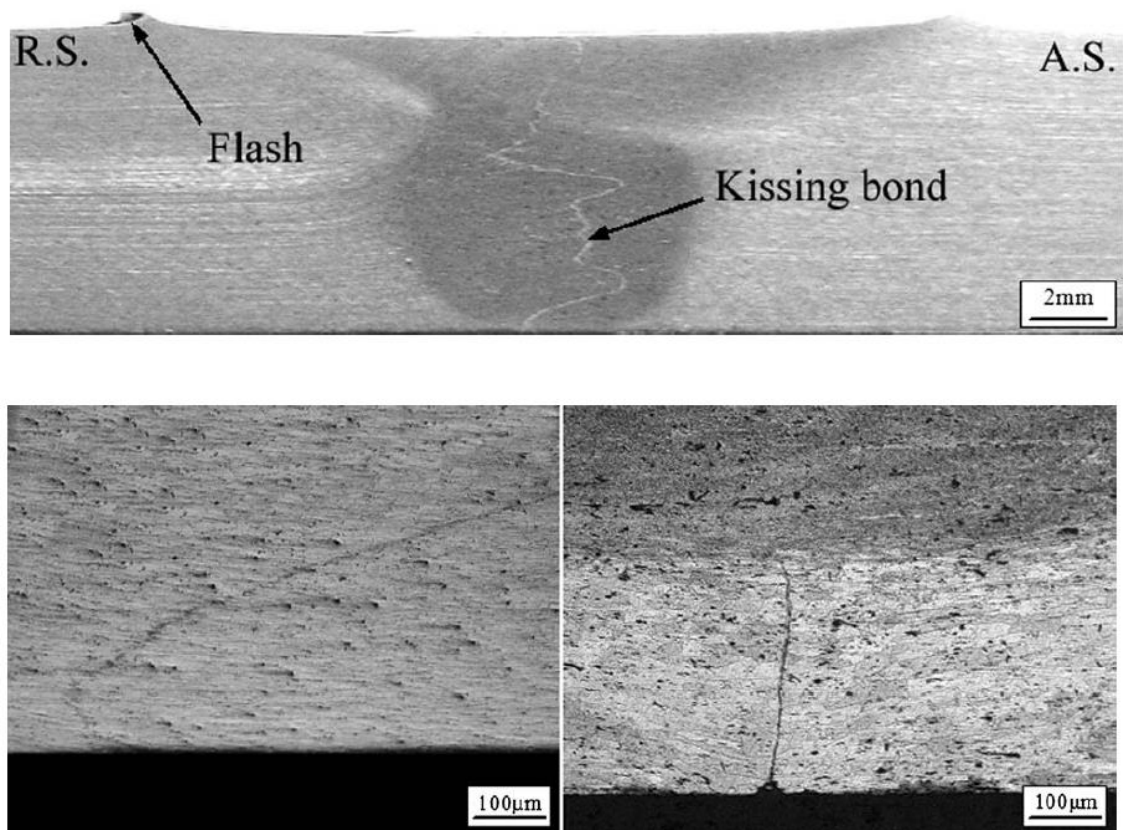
Optical micrograph of kissing bond and root flaw in conventional FSW joint [59].
